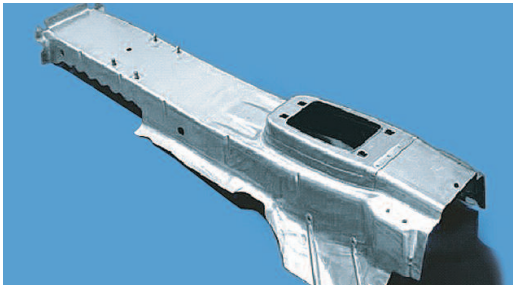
Main-frame part of an automobile made of hot-dip galvanized multiphase steel
